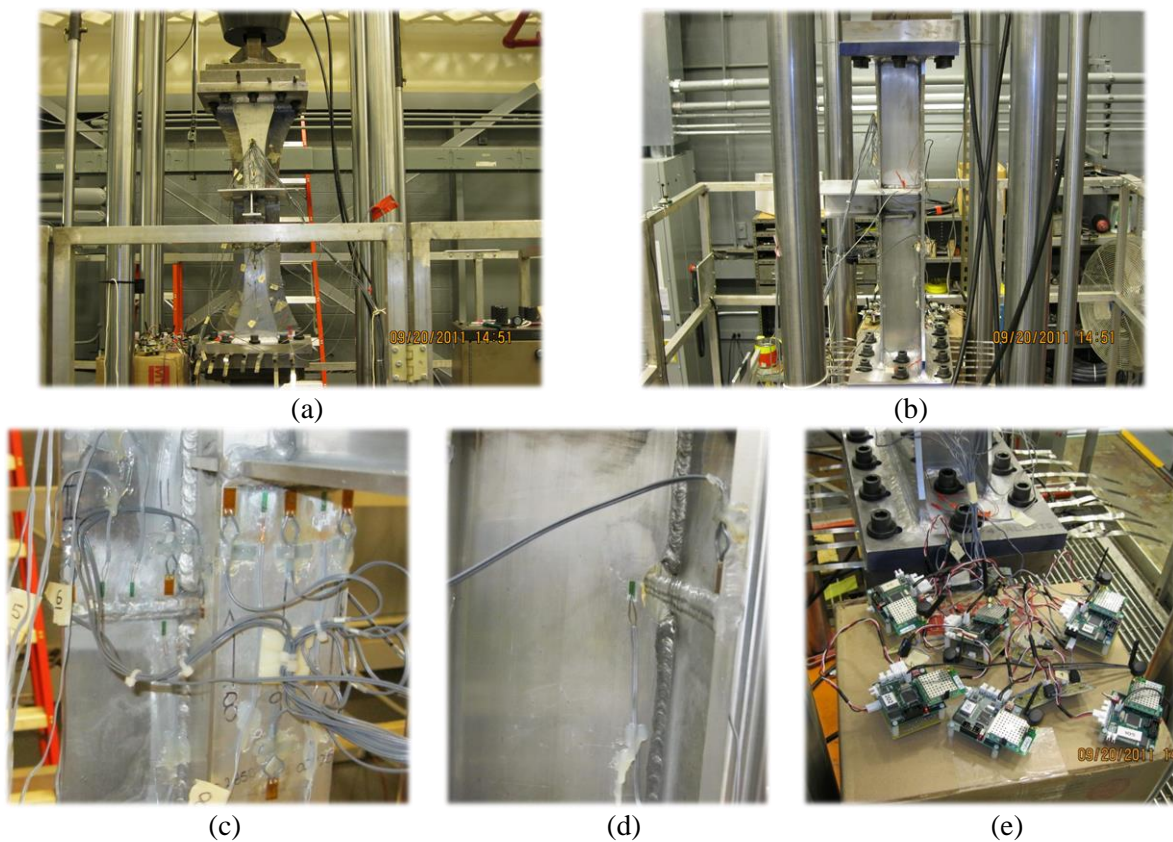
Aluminum hull stiffened fatigue test specimen (a) front and (b) side view w/ strain gages installed for *Narada* wireless sensing units (green gage) & NSWCCD (yellow gage) near (c) weld joints and (d) plate notch (e) and with installed *Narada* WSN shown.
